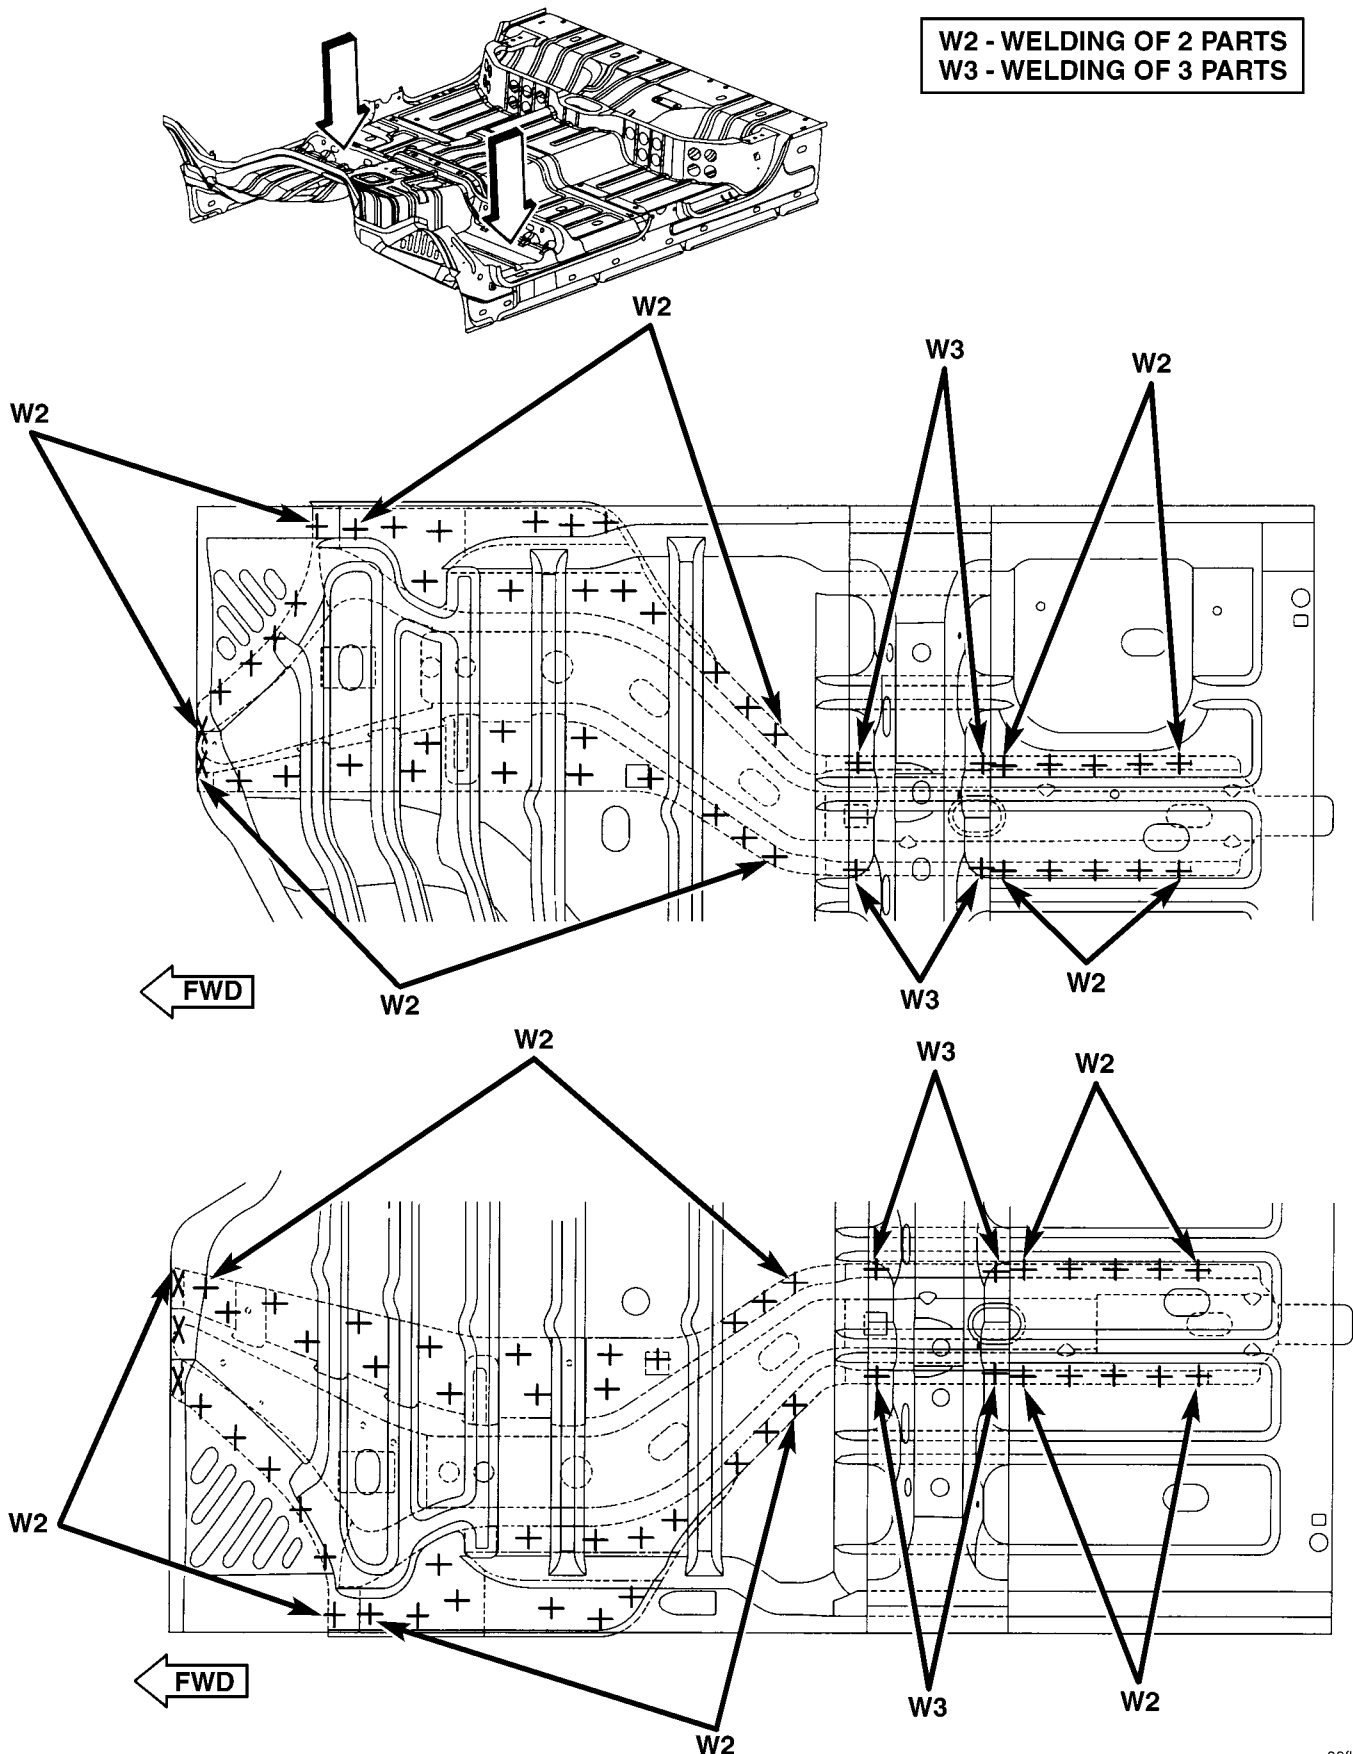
FRONT SEAT MOUNTING FRONT CROSSMEMBER
